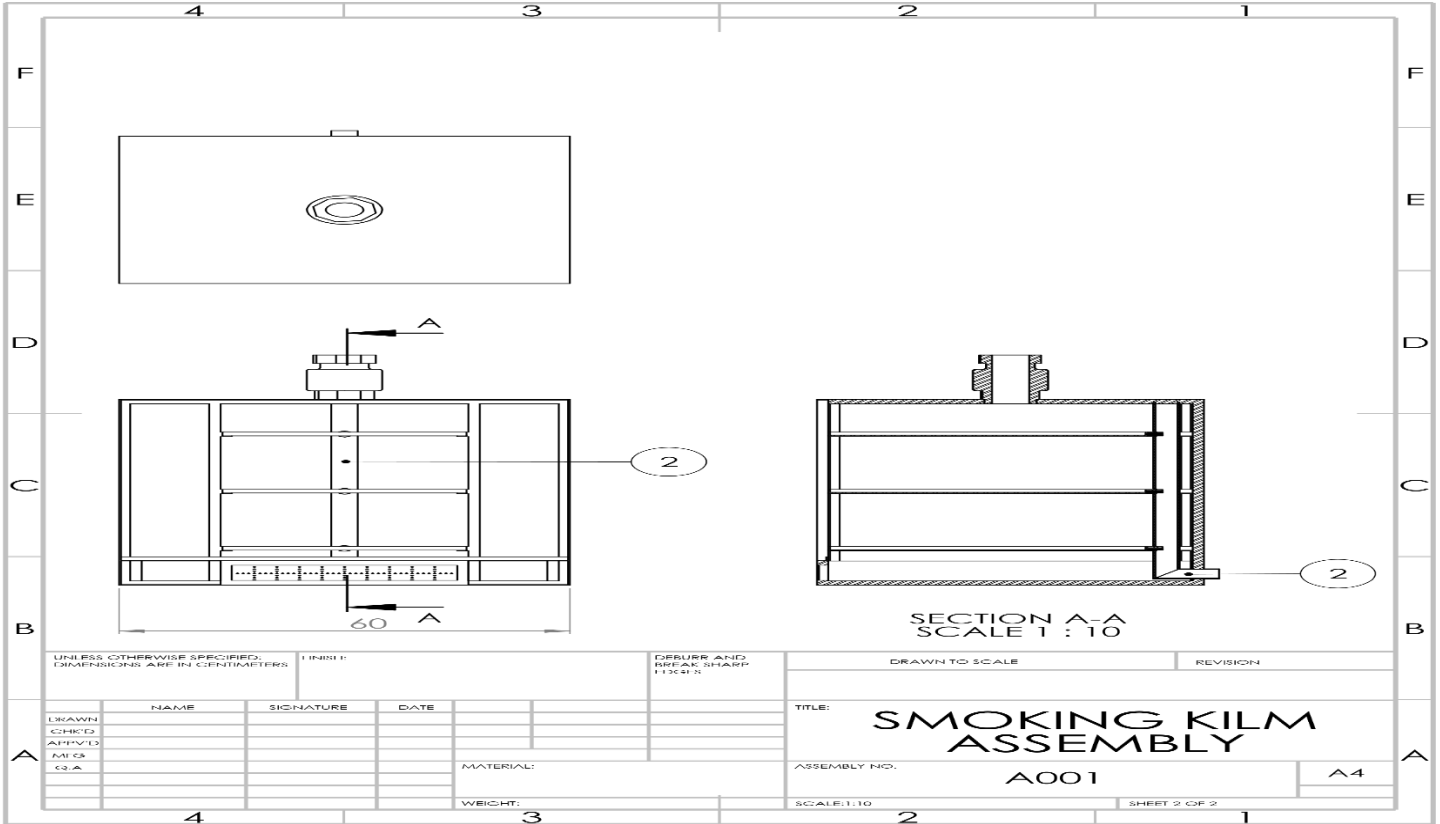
Orthographic Projection of Smoking Kiln Assembly
